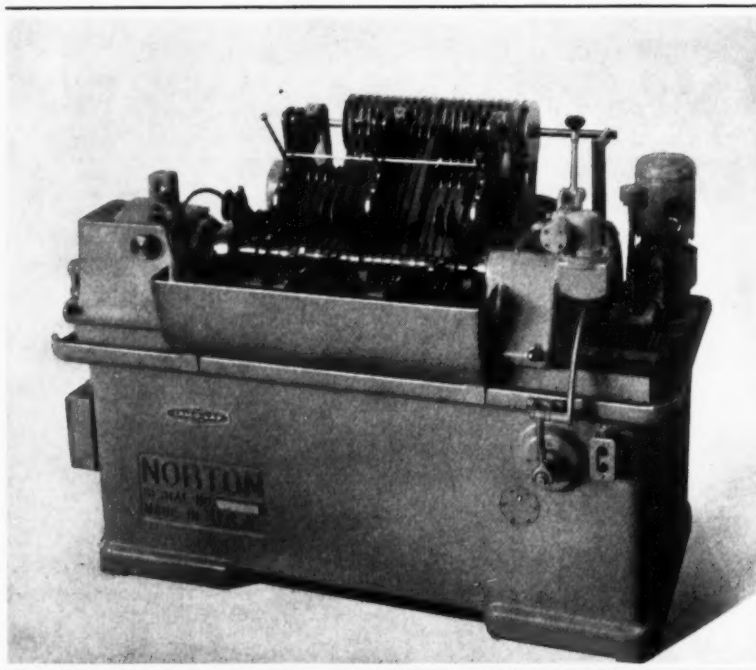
Norton "Cam-O-Lap" for Lapping the Cam Contours and the Bearings of Automobile Camshafts
